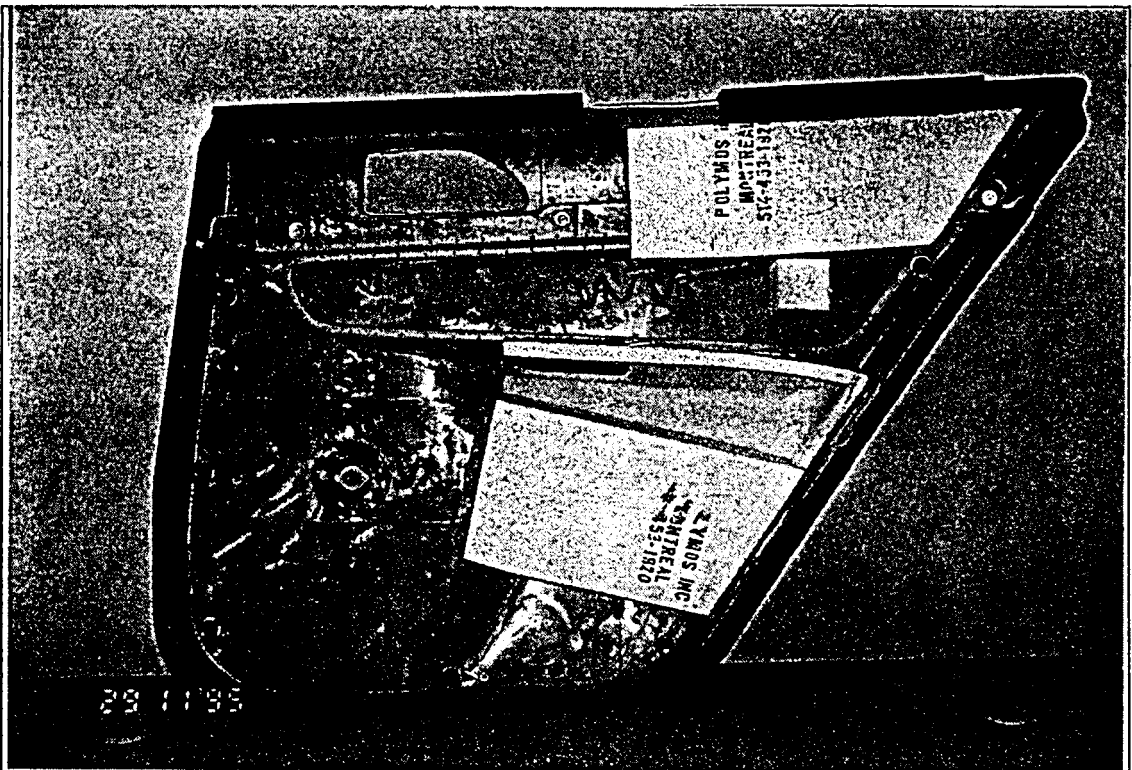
Modified Rear Left Honda Accord Door Assembly (Viewed from Outside)
